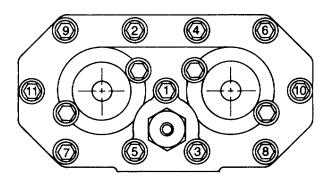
B-49. Cylinder Head Capscrew Torque Sequence
